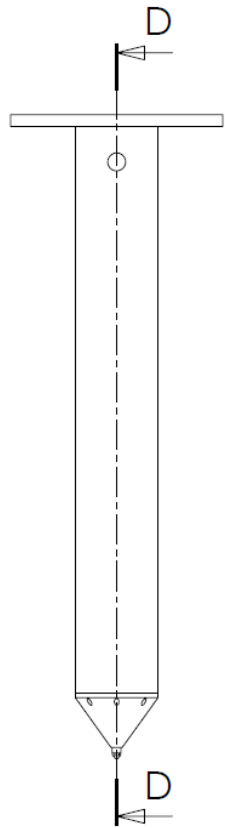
Pressure Vessel and Fuel Injector Assembly.
